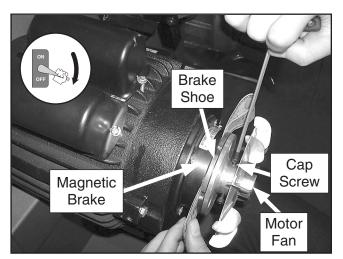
Adjusting distance between magnetic brake and brake shoe.
